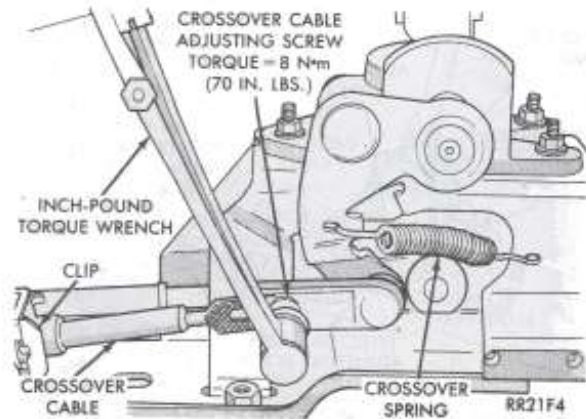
Adjusting Crossover Cable (G,J-Bodies)
